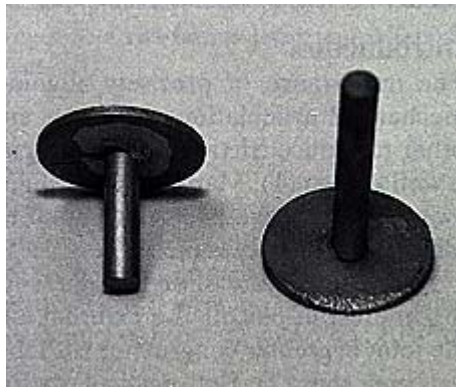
Steel washers brazed onto rivets create a flat surface perpendicular to the alignment channels.
